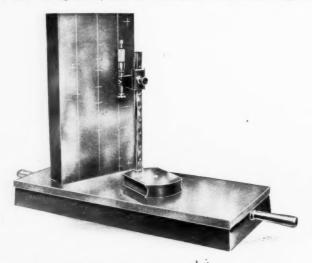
The Tool arranged as a Micrometer Scratch Gage laying out Centers for Boring.
